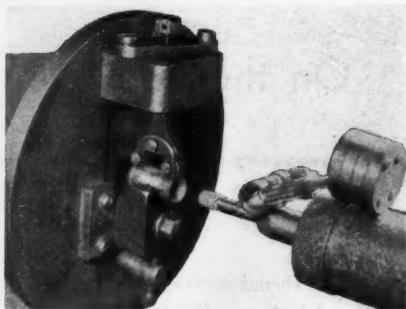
Fixture holding air motor piston assembly for internal grinding.
